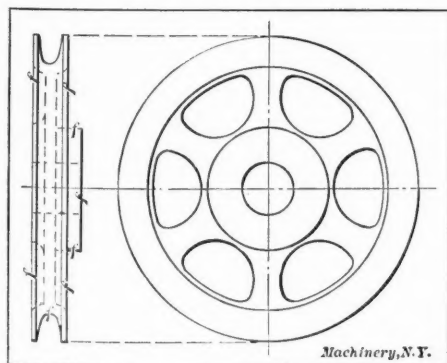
Pulley that is finished by the Tools shown in Figs. 6 and 7
